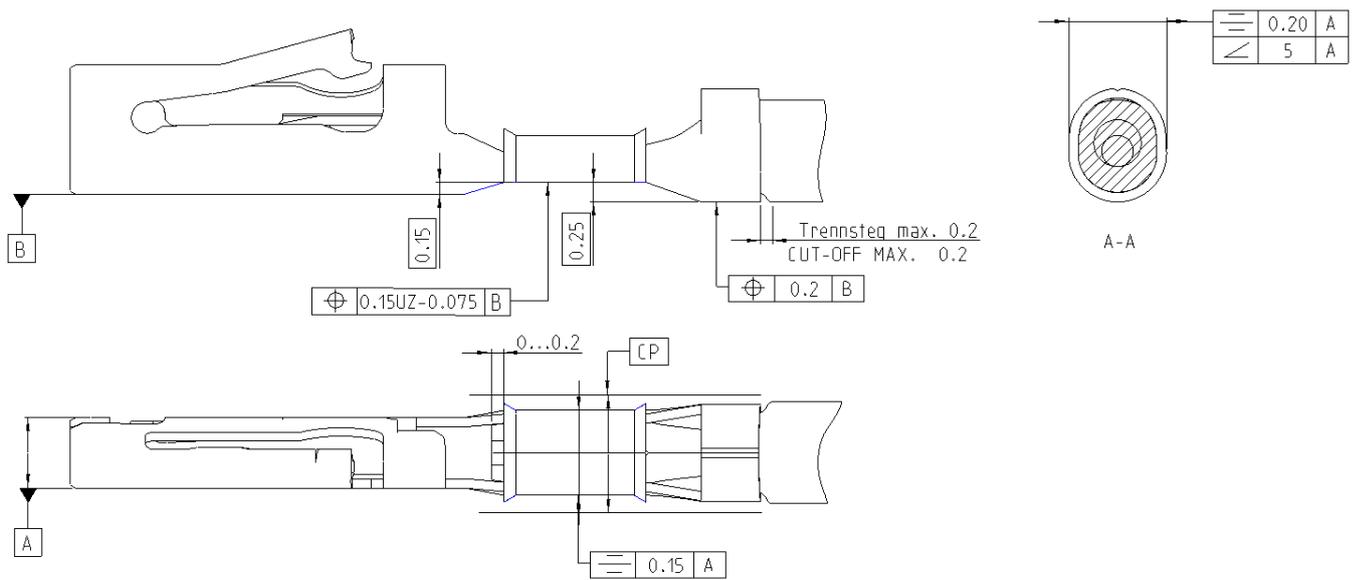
/ Abb. 7 Shape and position tolerances / Form- und Lagetoleranzen PN 2320281
